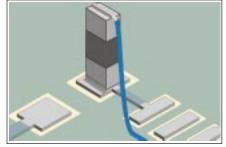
Acceptable* Wire soldered to component end, lifted off pad.
